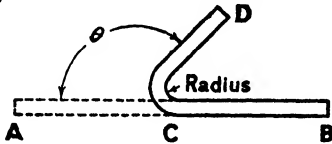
A SPECIFIED BEND TEST THROUGH ANGLE θ
